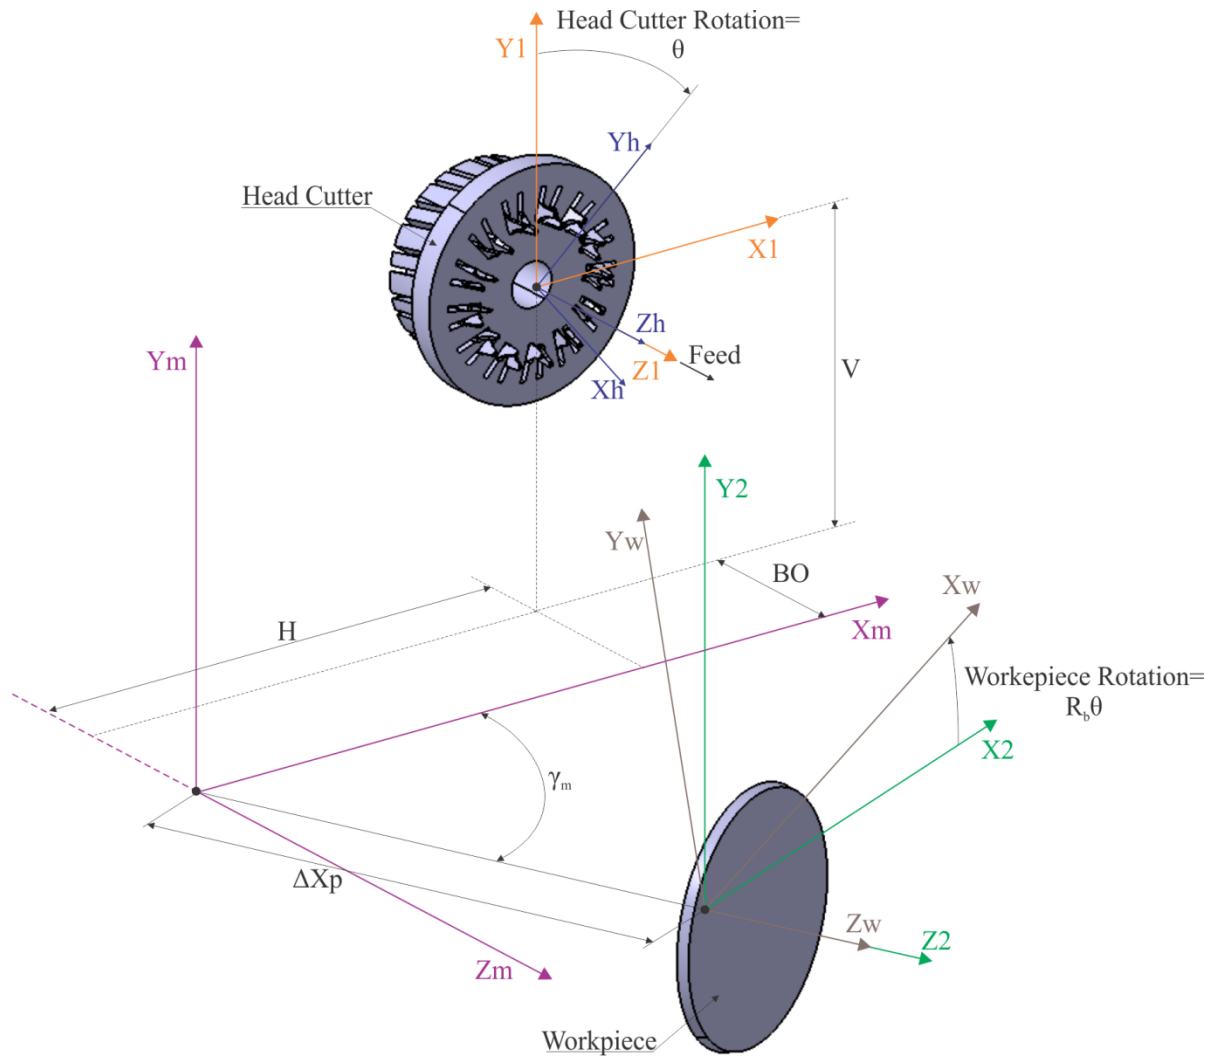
Formate™ machine tool structure and the workpiece setup.
